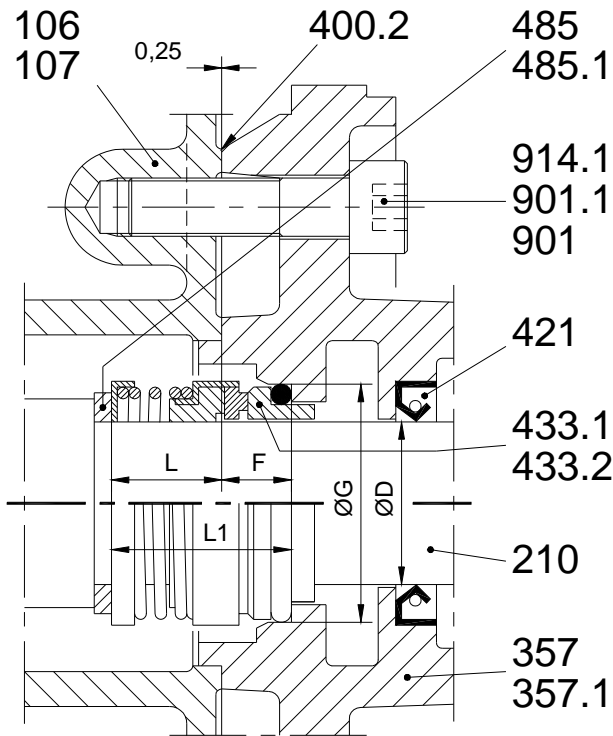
Typical drawing of mechanical seal with dimensions valid for both pump ends
